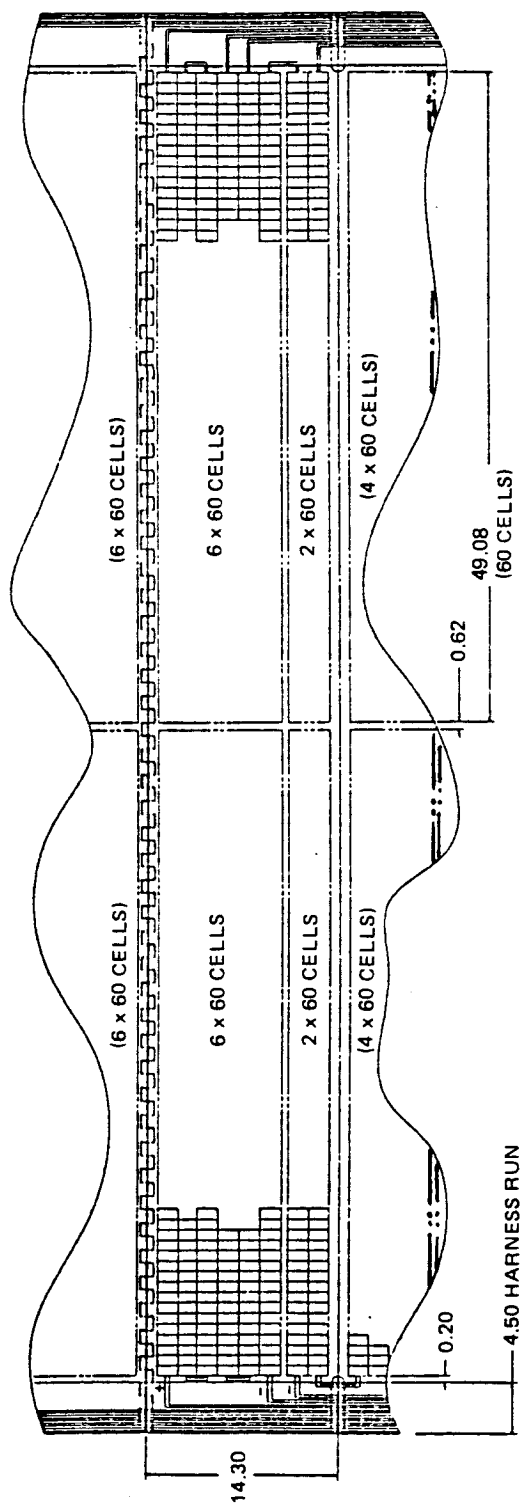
Flexible Blanket Solar Panel Assembly (SPA)
